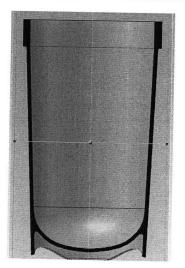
Cross-section of Bottle. The picture shows a cross-section taken from solid model of prototype.
